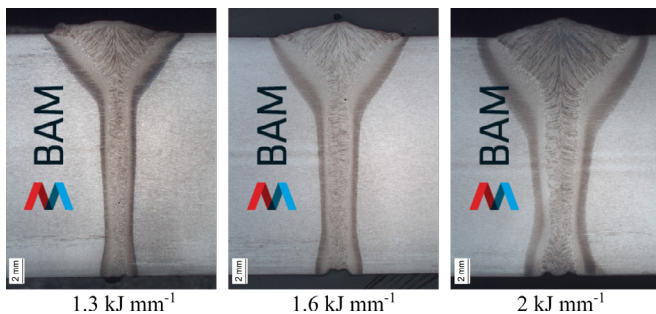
Cross-sections of the single-pass laser hybrid welded 20 mm thick S690QL plates with different heat inputs and contactless electromagnetic backing
